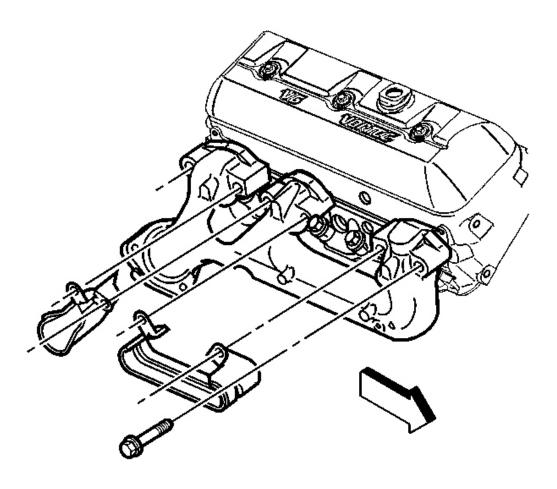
Exhaust Manifold Bolts Courtesy of GENERAL MOTORS CORP.
